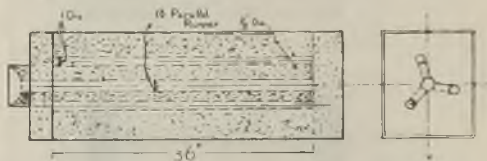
MOULD USED FOR CASTING THREE TEST PIECES CONTROLLING TEMPERATURE BOTH OF THE MOULD AND METAL.
